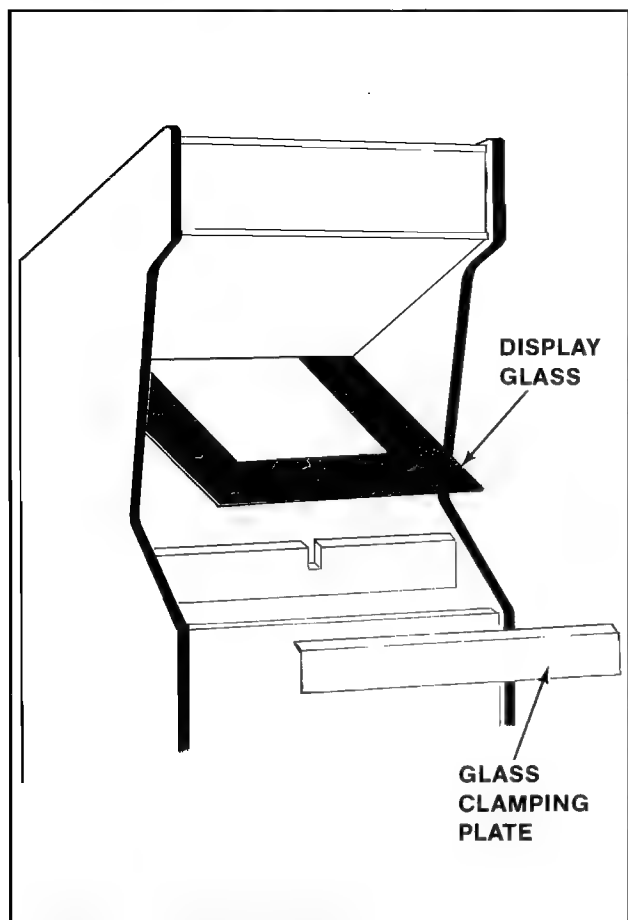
Removing the Main Display Glass & T.V. Bezel — Upright
